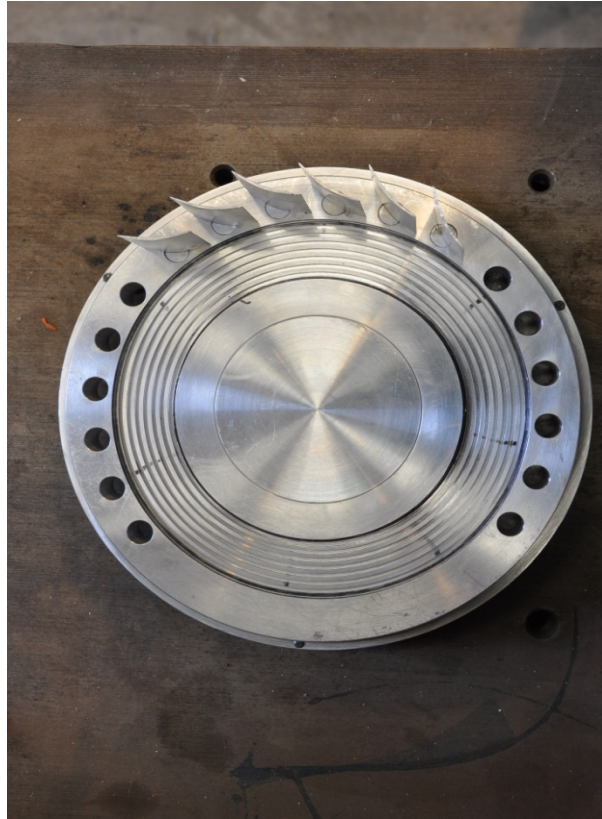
Inlet Guide Vanes Installed in Blanking Plate
